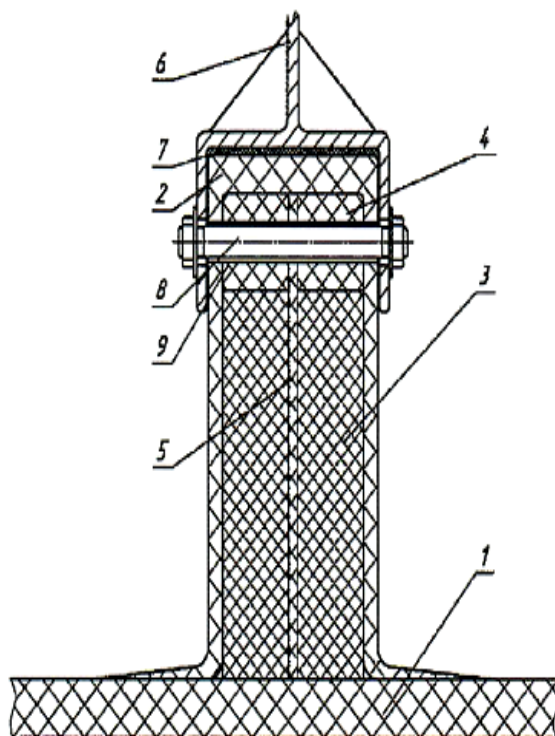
Joint of a support element of an engine (equipment) to the seating closed box section with the use of bolts:
